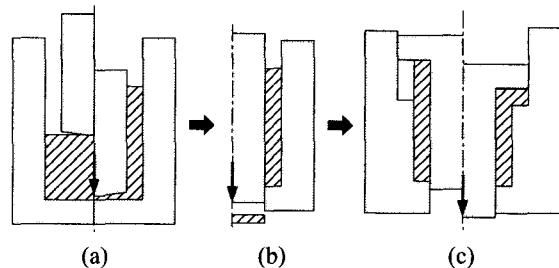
Forming process of a hollow T-shaped part using a hollow initial billet (method-2), (a) backward extruding, (b) piercing, and (c) upsetting process
